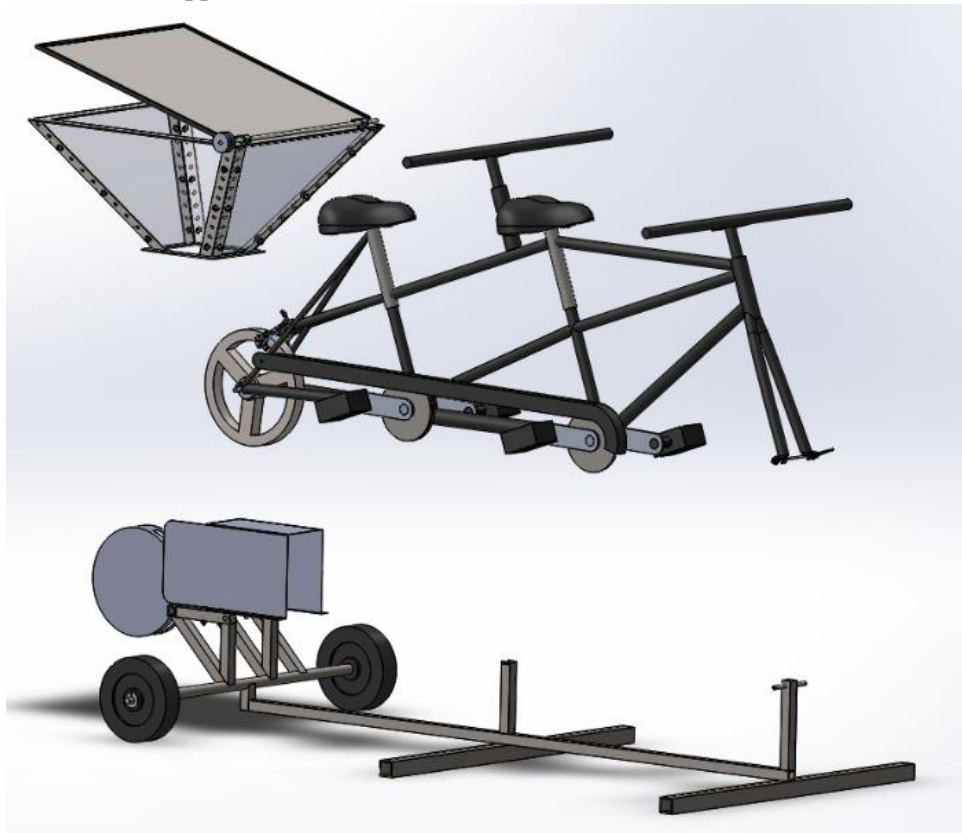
Disassembled Bike Frame and Drive Train, Support Frame and Cutting Mechanism (Not Visible), and Hopper.
